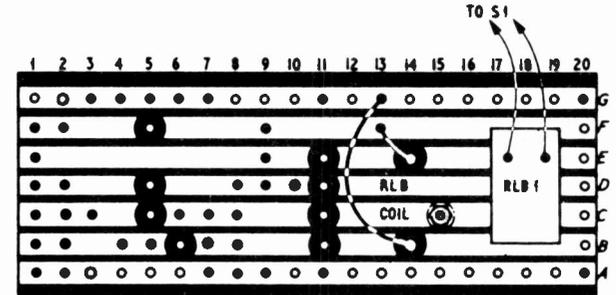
Underside view of board showing the cut out for the relay and cuts in the copper strips
